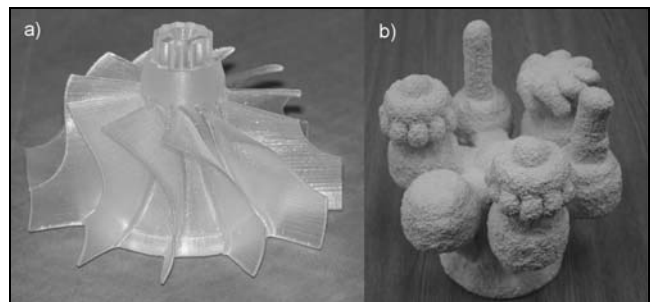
Turbine rotor SLA model (a), ceramic mould (b)
